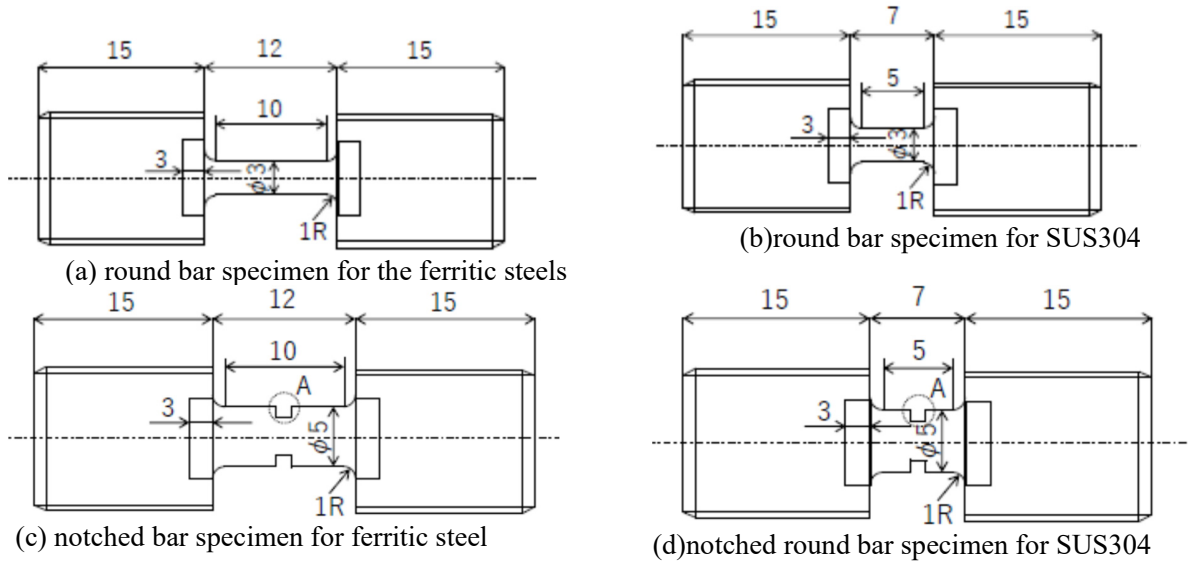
Test pieces for normal tensile tests. Units are mm. “A” indicates circumferential notch in Figure 4. It is noted that the grip size depends on a test machine.
